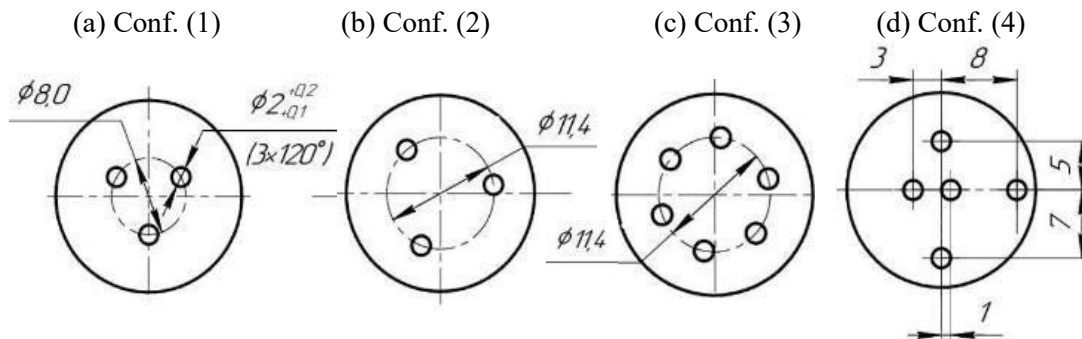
Drawing of initial configurations of hybrid Cu samples before CE processing. Diameter of each sample is 20 mm.
